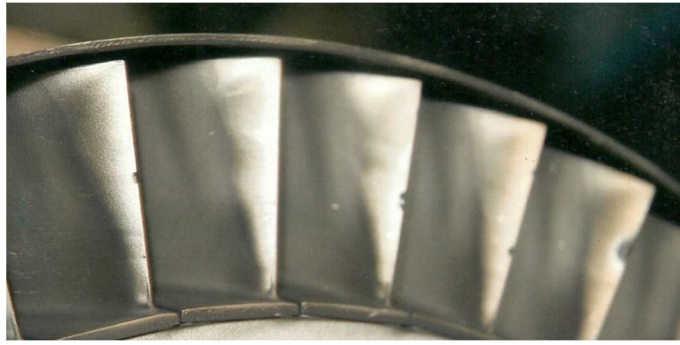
View of the compressor rotor with both undamaged and damaged blades (FOD) [1]
